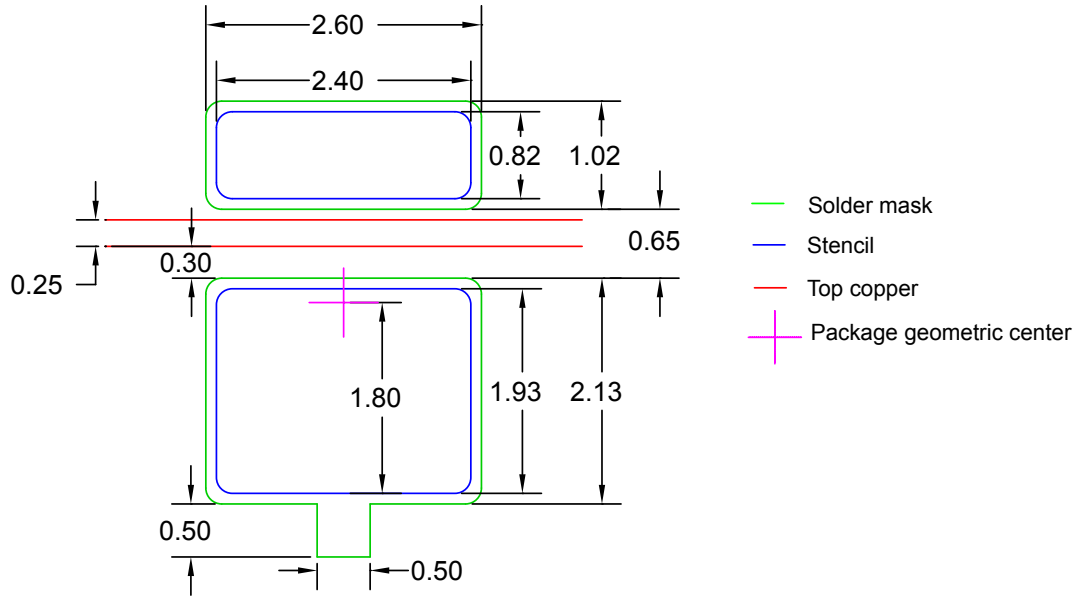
Recommended PCB solder pad layout for LUXEON 3535L Color Line.
